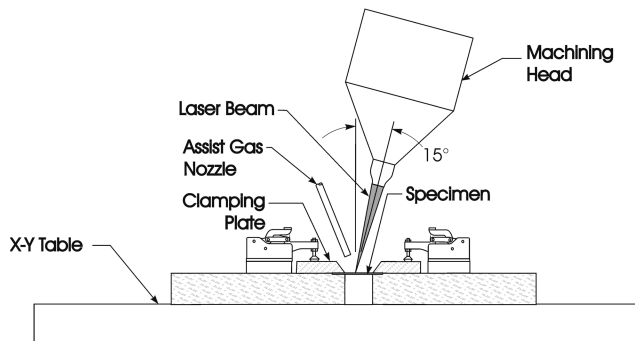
Schematic of the welding jig used in the welding experiments.
